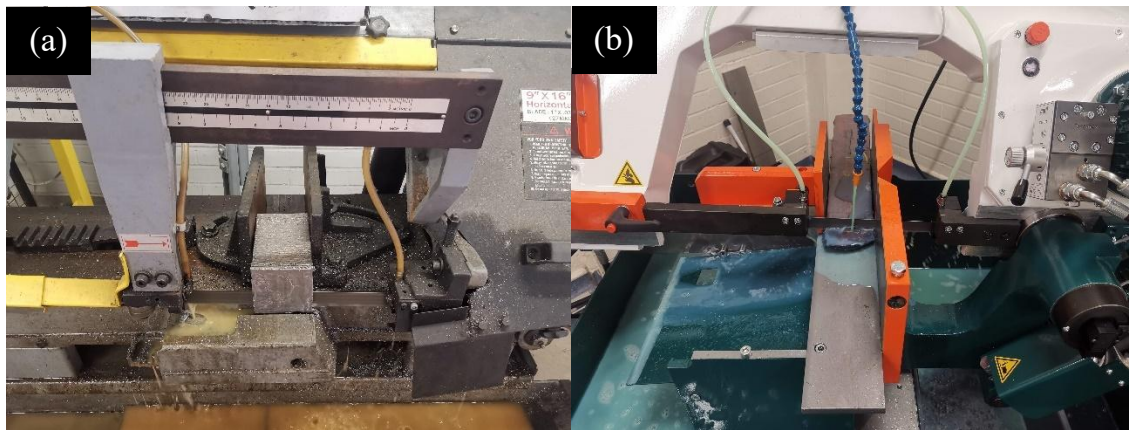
Band saw cutting of (a) as-cast MA ingot and (b) hot-rolled MA steel
